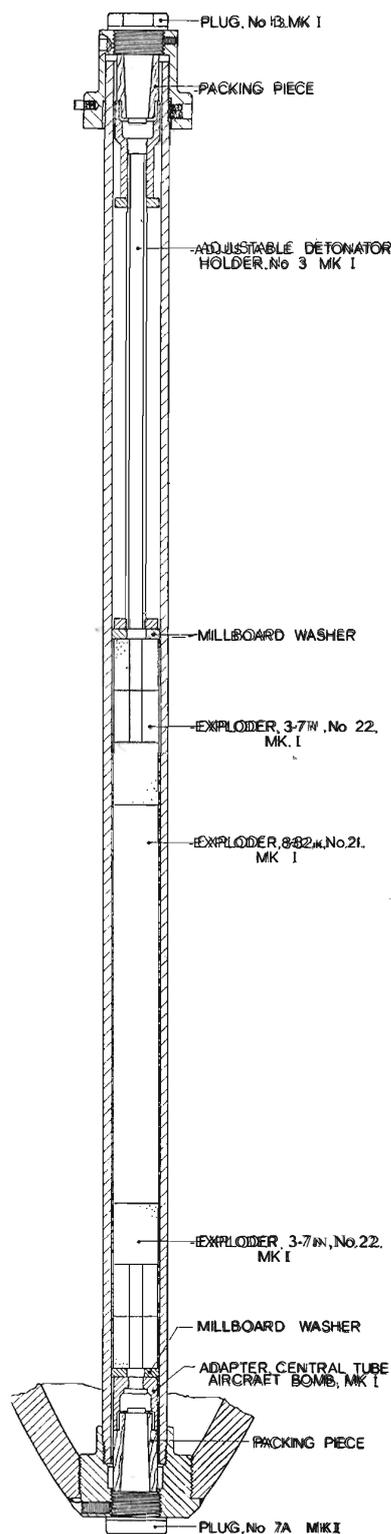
Bomb, H.E., aircraft, G.P., 120 lb., Mk. I or II, exploded to Scheme C
